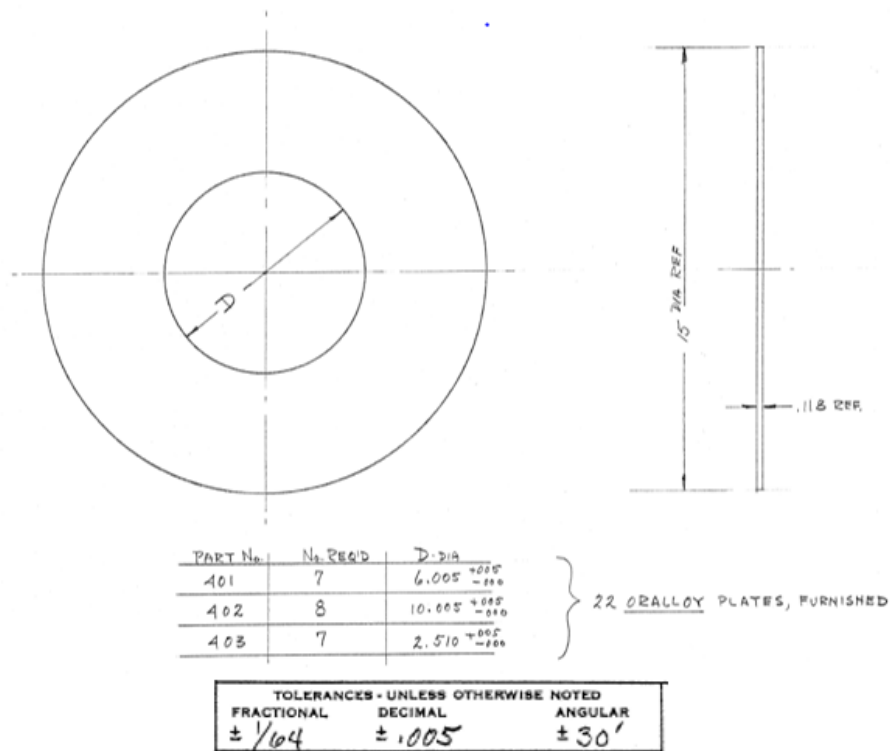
Engineering Drawing (19Y-29621-D27) of the Following HEU Rings: HEU 15/6, 15/10, and 15/2.5 (Dimensions in Inches).
